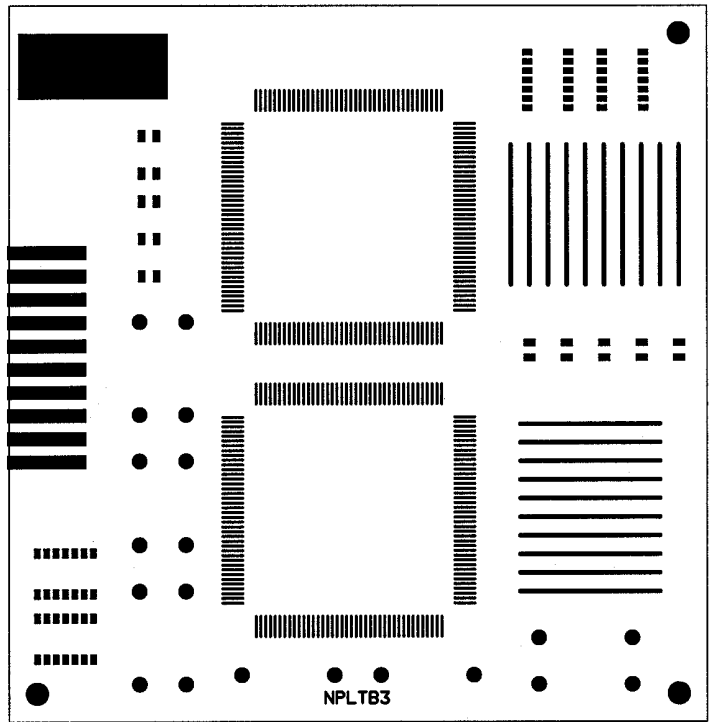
Layout of the test board (Dimensions 95 x 97mm)
